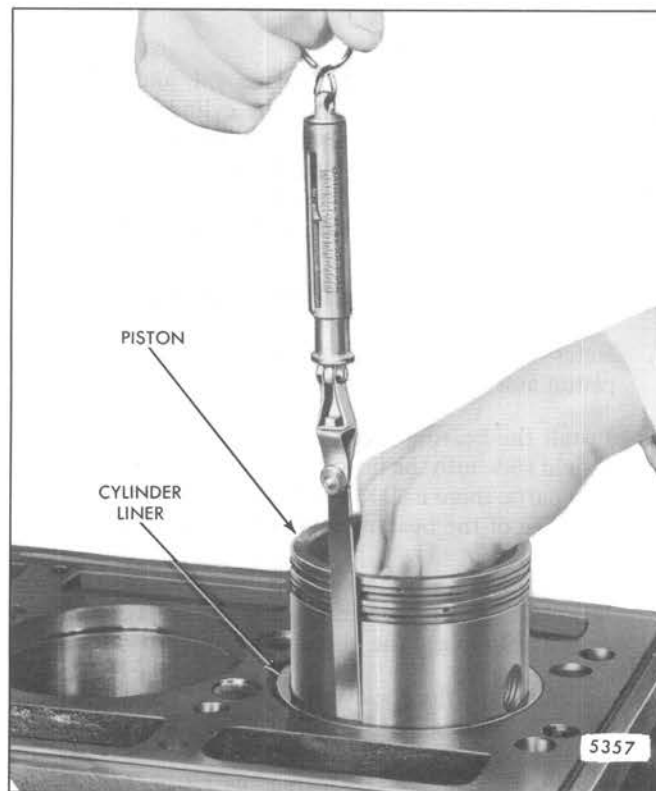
Measuring Piston-to-Liner Clearance with Gage J 5438-01
